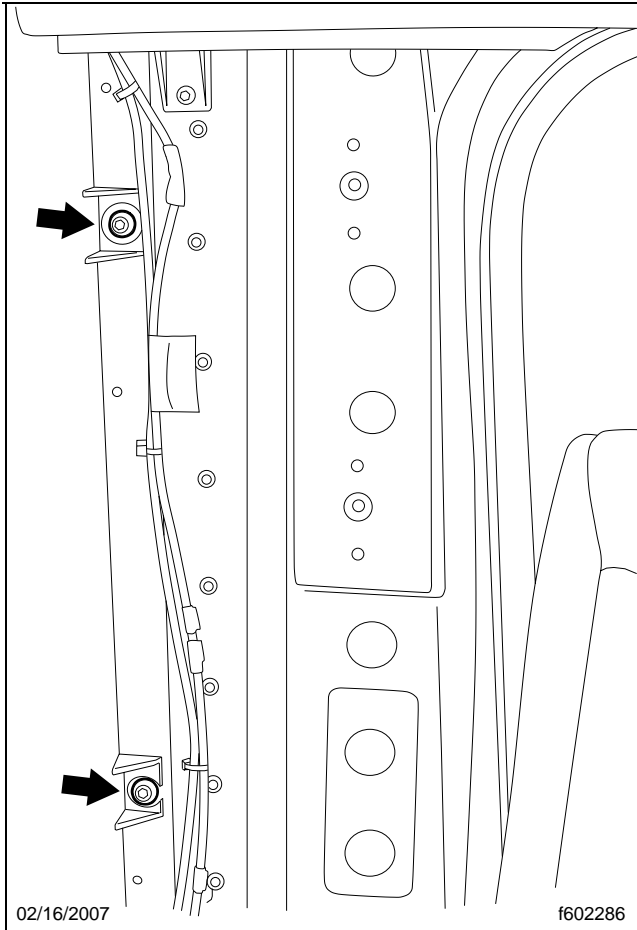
, Cabinet-to-Side Wall Fasteners Behind Seat
